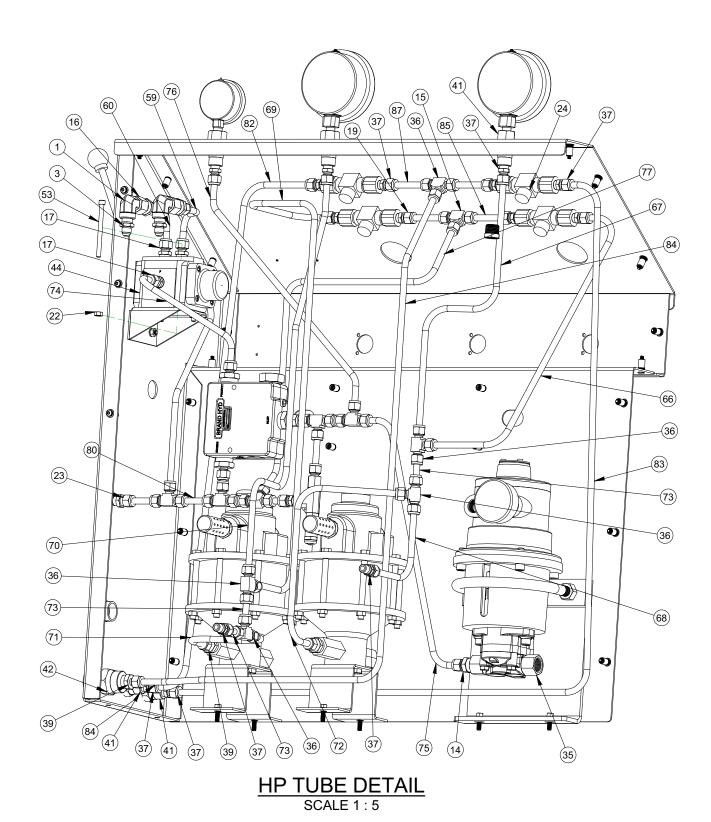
CONSOLE ASSEMBLY (P/N 88479)
